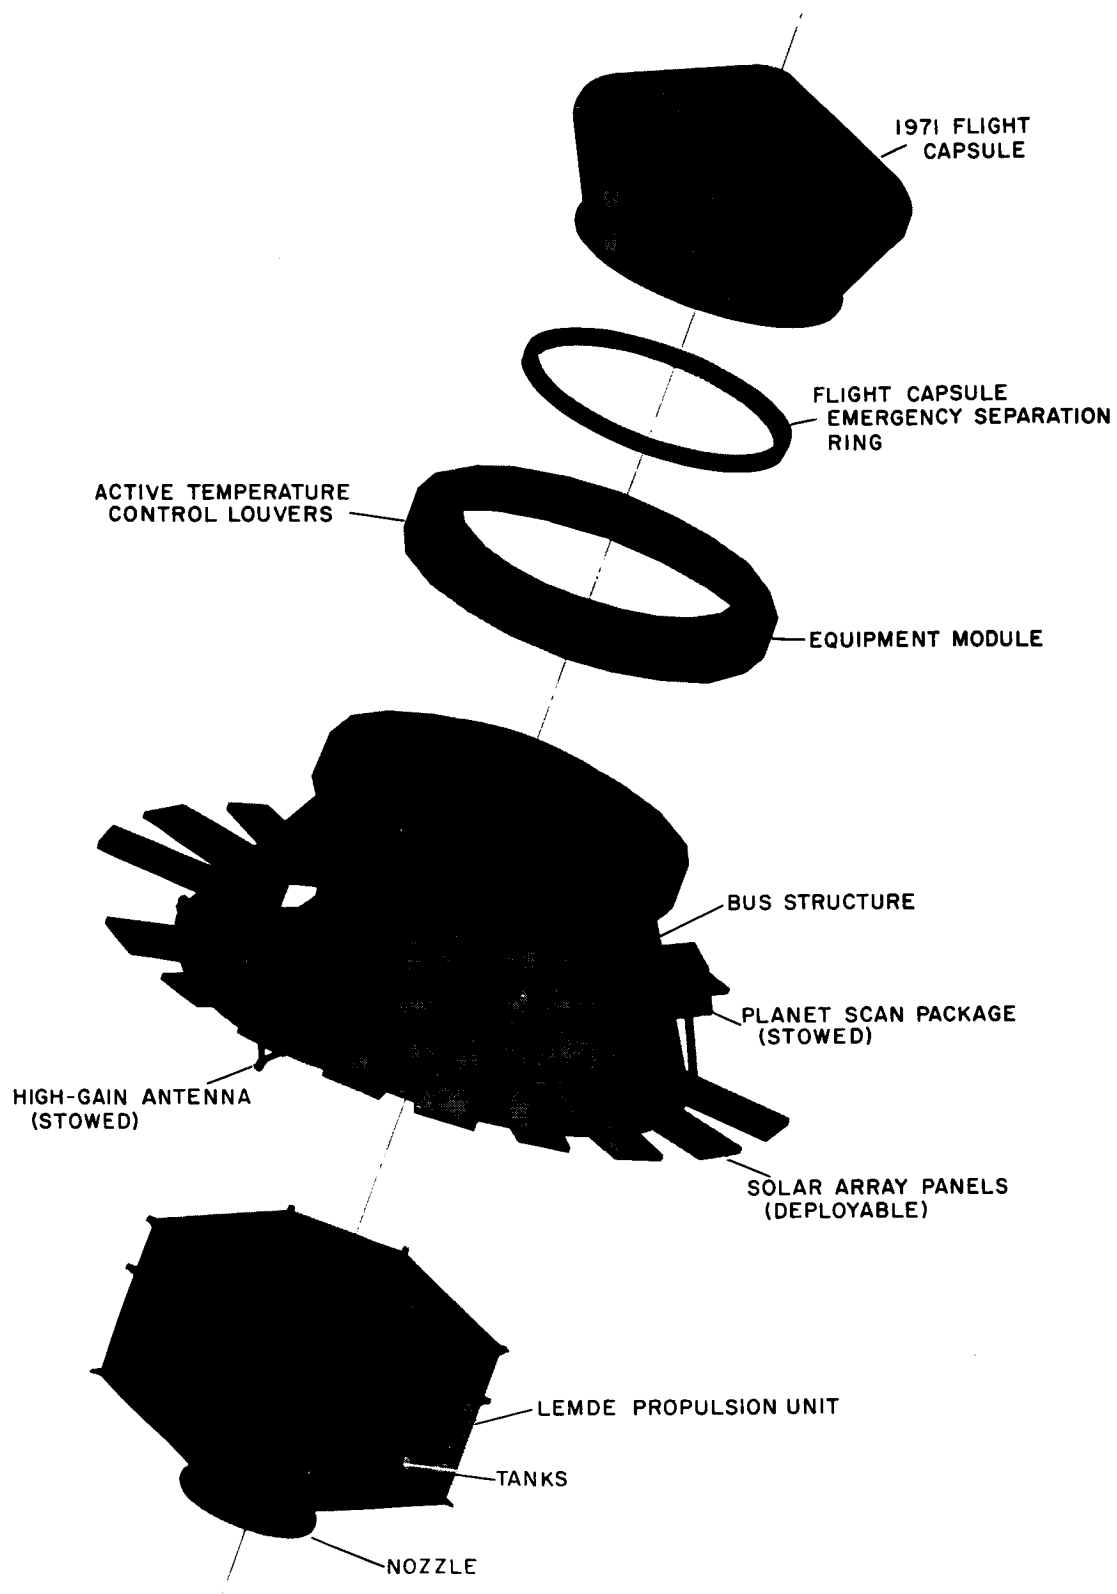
Unmodified LEMDE Configuration of Exploded View
